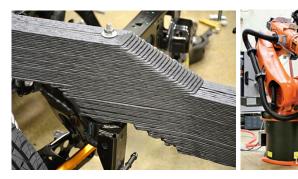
Extruded short fiber filled ABS frame of the ORNL BAAM Cobra car and robotic extruder.
